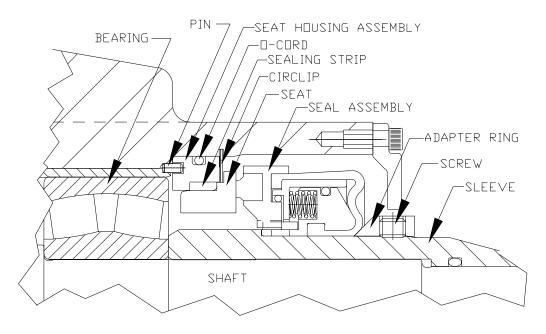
Arrangement for Drive Assemblies 1018684, 1007027A, and similar drives having mechanical seal mounted on sleeve
